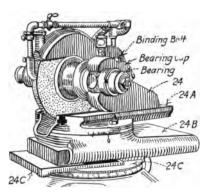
Grinding machine wheel head. The wheel stand (24) may be clamped in the desired position on the wheel stand platen (24A). The platen may be swivelled on the wheel stand slide (24B). The wheel stand slide bearings are very accurately scraped to fit similarly finished surfaces on the wheel stand slide bed (24C) and the movement of the slide (24B) on the bed (24C) gives the cross feed of the wheel. The bed is pivoted and may be swivelled and clamped in an angular position for the purpose of grinding abrupt tapers or angles. See Fig. 257.
